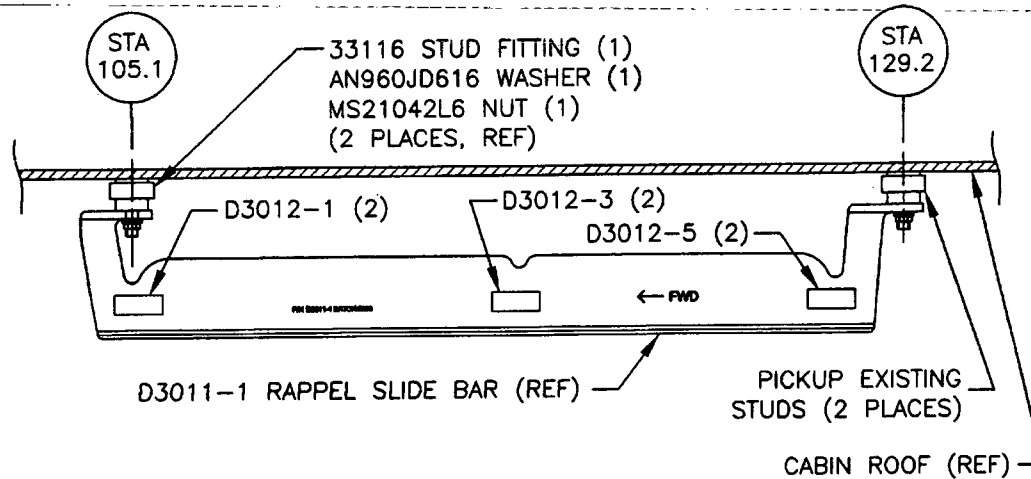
Installation of D205-523-043 Slide Bar Assembly
